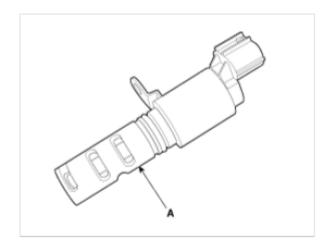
Identifying Oil Control Valve Sleeve Courtesy of HYUNDAI MOTOR AMERICA
